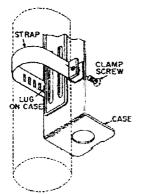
Skeleton view of case, mounting plate (temperature element),and mounting strap. First fasten strap to case by the clamp screw. Place control on tube or pipe and place slot of mounting strap over tab on case. Tighten clamp screw to a snug fit. CAUTION: Do not tighten too tightly. Strap must not be inside of cover. Control mounting plate is also the temperature element and must not be denied or crushed as this will change control setting. Clip off or bend back excess strapping.
